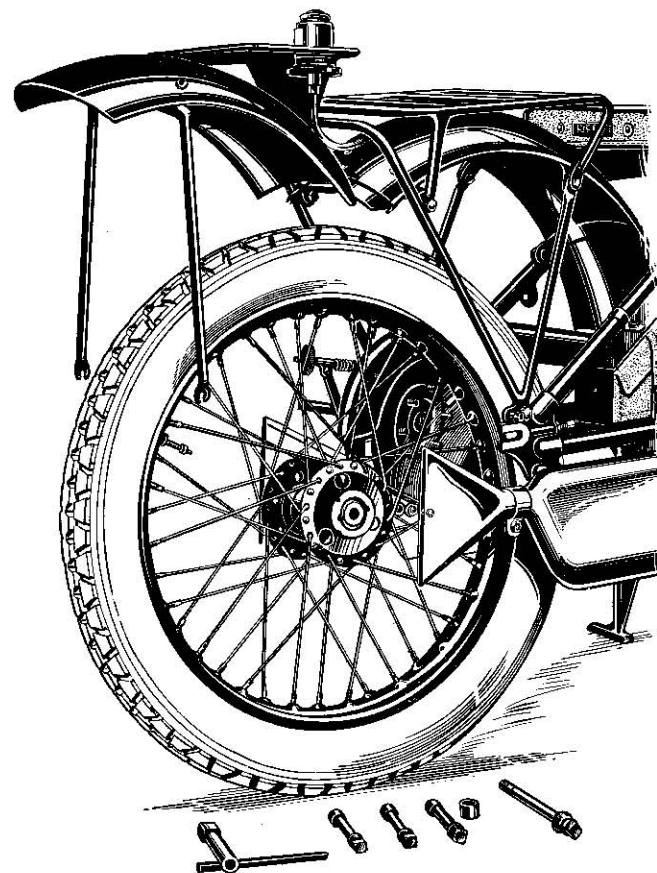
REAR DETACHABLE WHEEL REMOVAL
